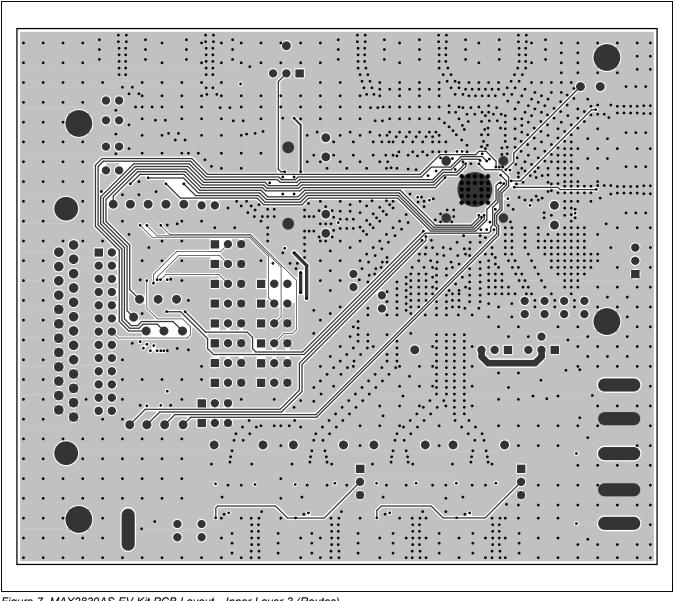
MAX2839AS EV Kit PCB Layout—Inner Layer 3 (Routes)
